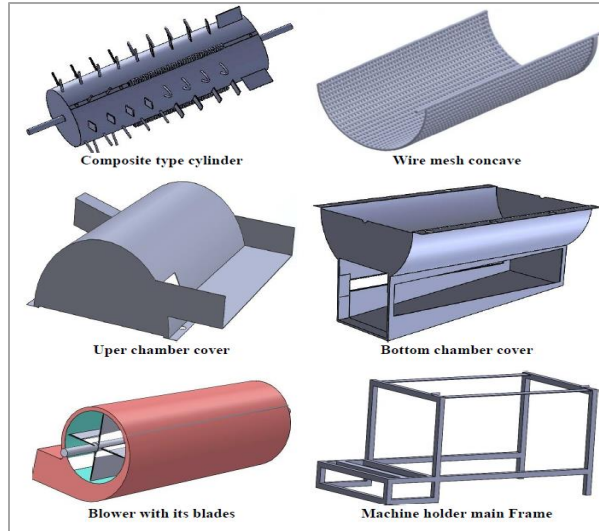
Main component parts of the thresher designed with composite type cylinder.
